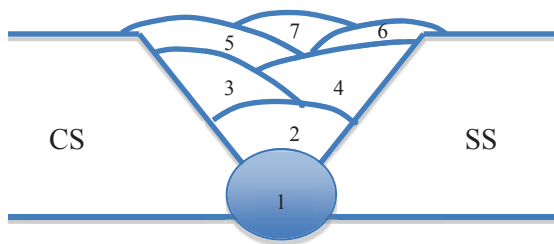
, Schematic sketch of how sample 1 (with gap) is welded. Figure 7, Schematic sketch of how sample 2 (without gap) is welded.
